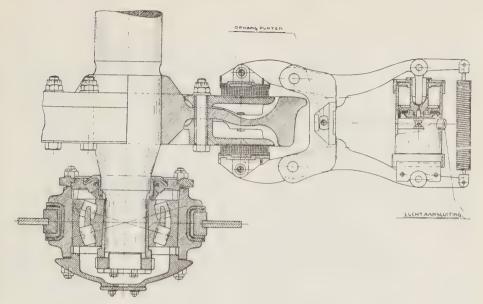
Section of wheel showing disc brake assembly and axlebox.
